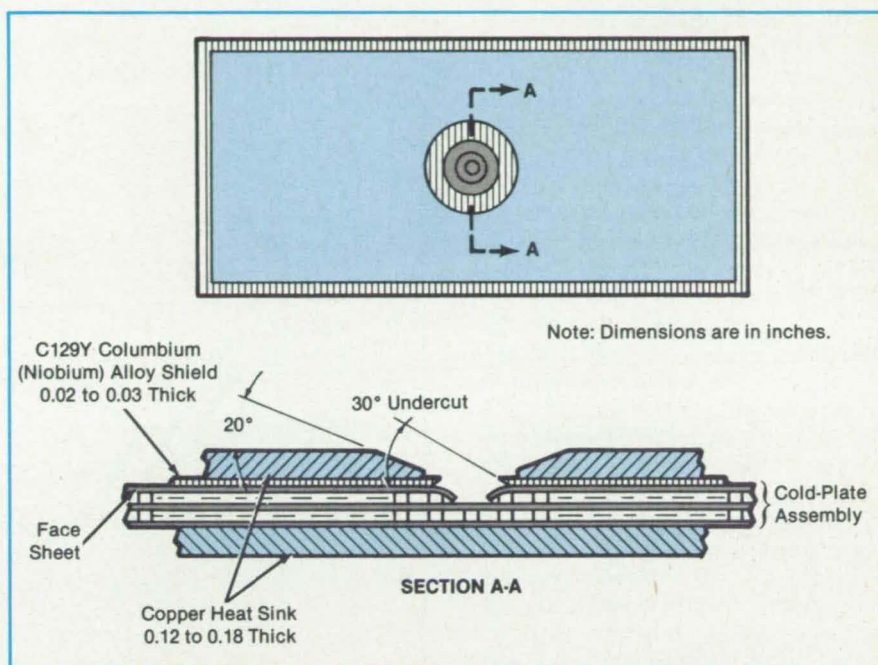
Before Welding, the edge of the hole in the face sheet is depressed into the cavity, and the shield and heat sink are clamped in place.
